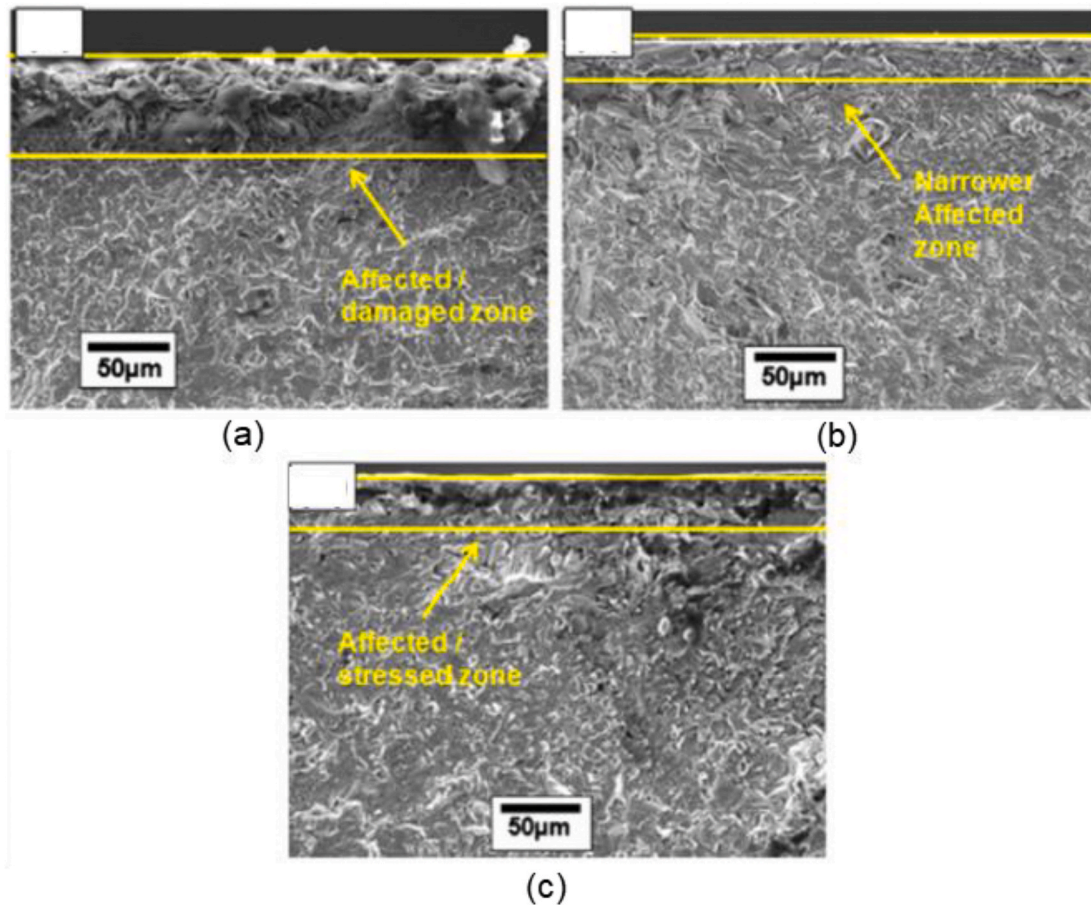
Antar et al. [62] studied the influence of machined surface layers on the fatigue performance of Udimet 720 Ni-base superalloy. Machining-induced zones are clearly visible from fracture surfaces for (a) wire EDM roughing, (b) wire EDM finishing, (c) flank milling.
